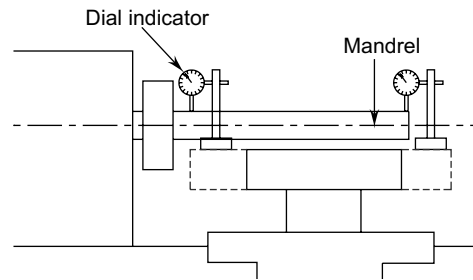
Test setup for true running of the centre in the lathe spindle
